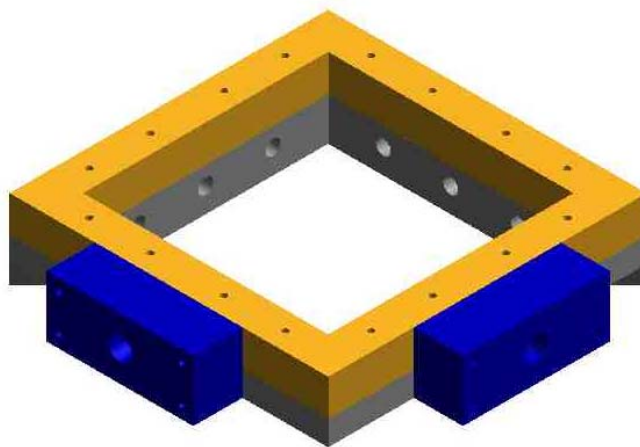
CAD model of the assembled model with the connecting parts.
